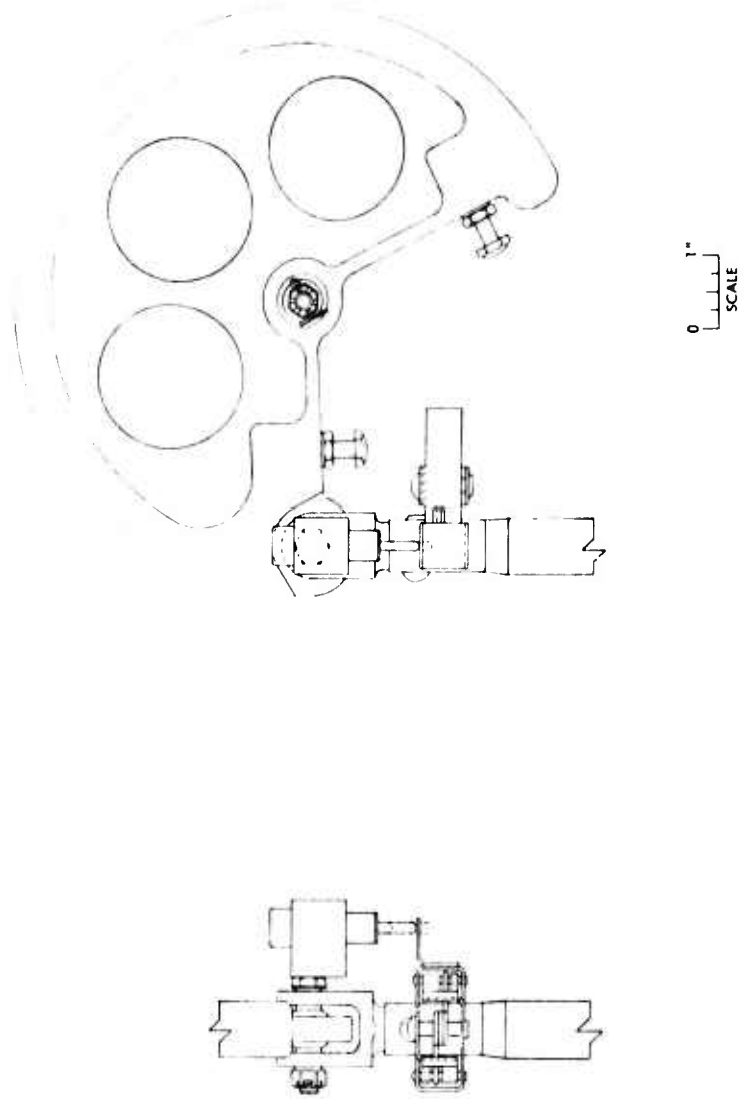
Rod End Bearing Play Sensor (Sheet 3 of 5).
